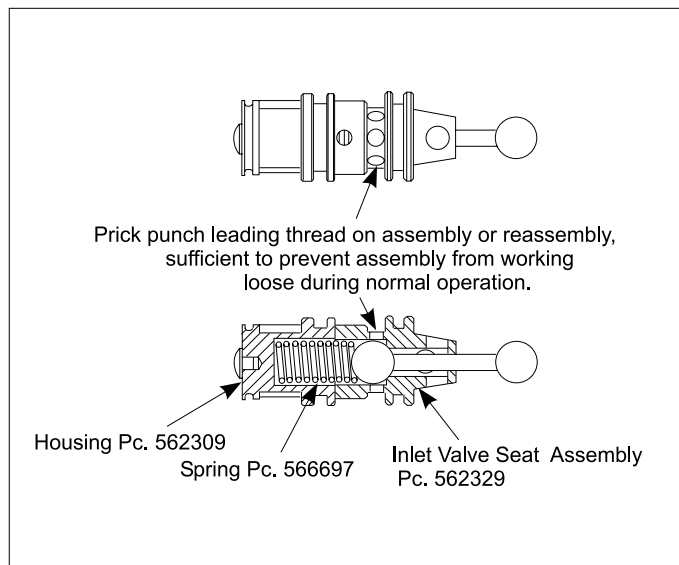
Inlet and Exhaust Valve Unit - ASSEMBLY
